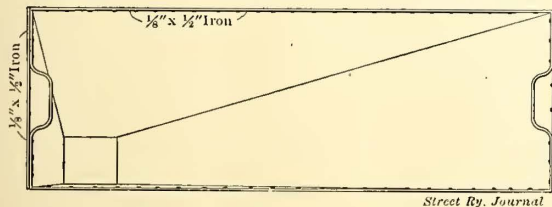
PLAN OF SAND-BOX, WASHINGTON CAR
